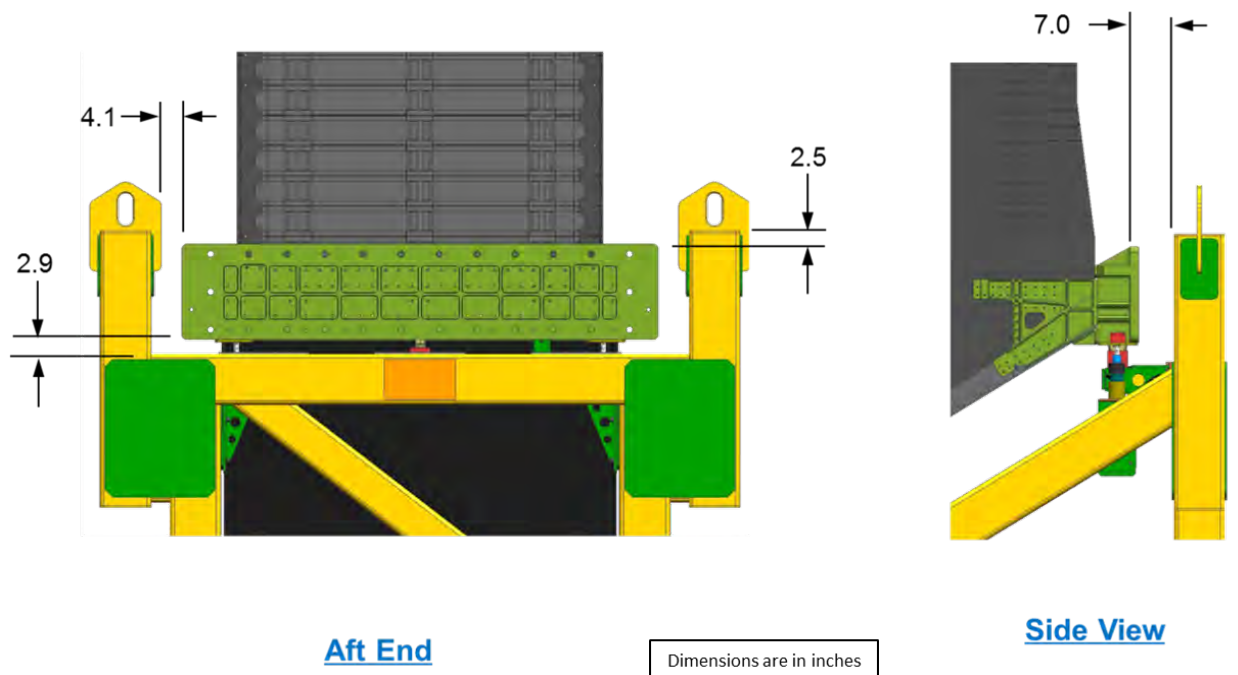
Clearances to the Fixture for Platen Hole-Drilling Operation
